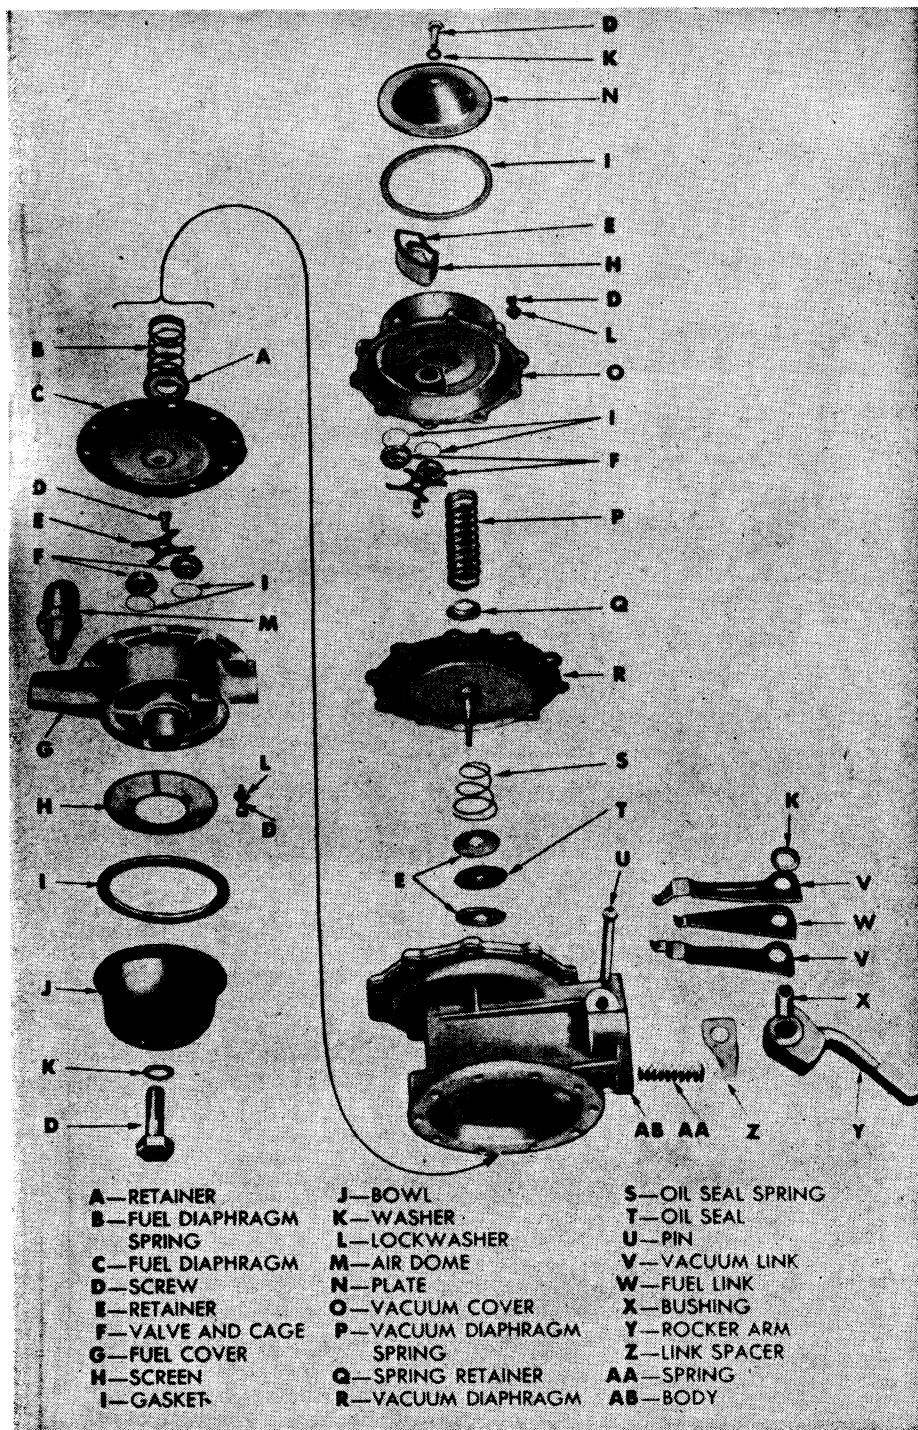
Fuel and vacuum pump disassembled. Typical series AJ construction
